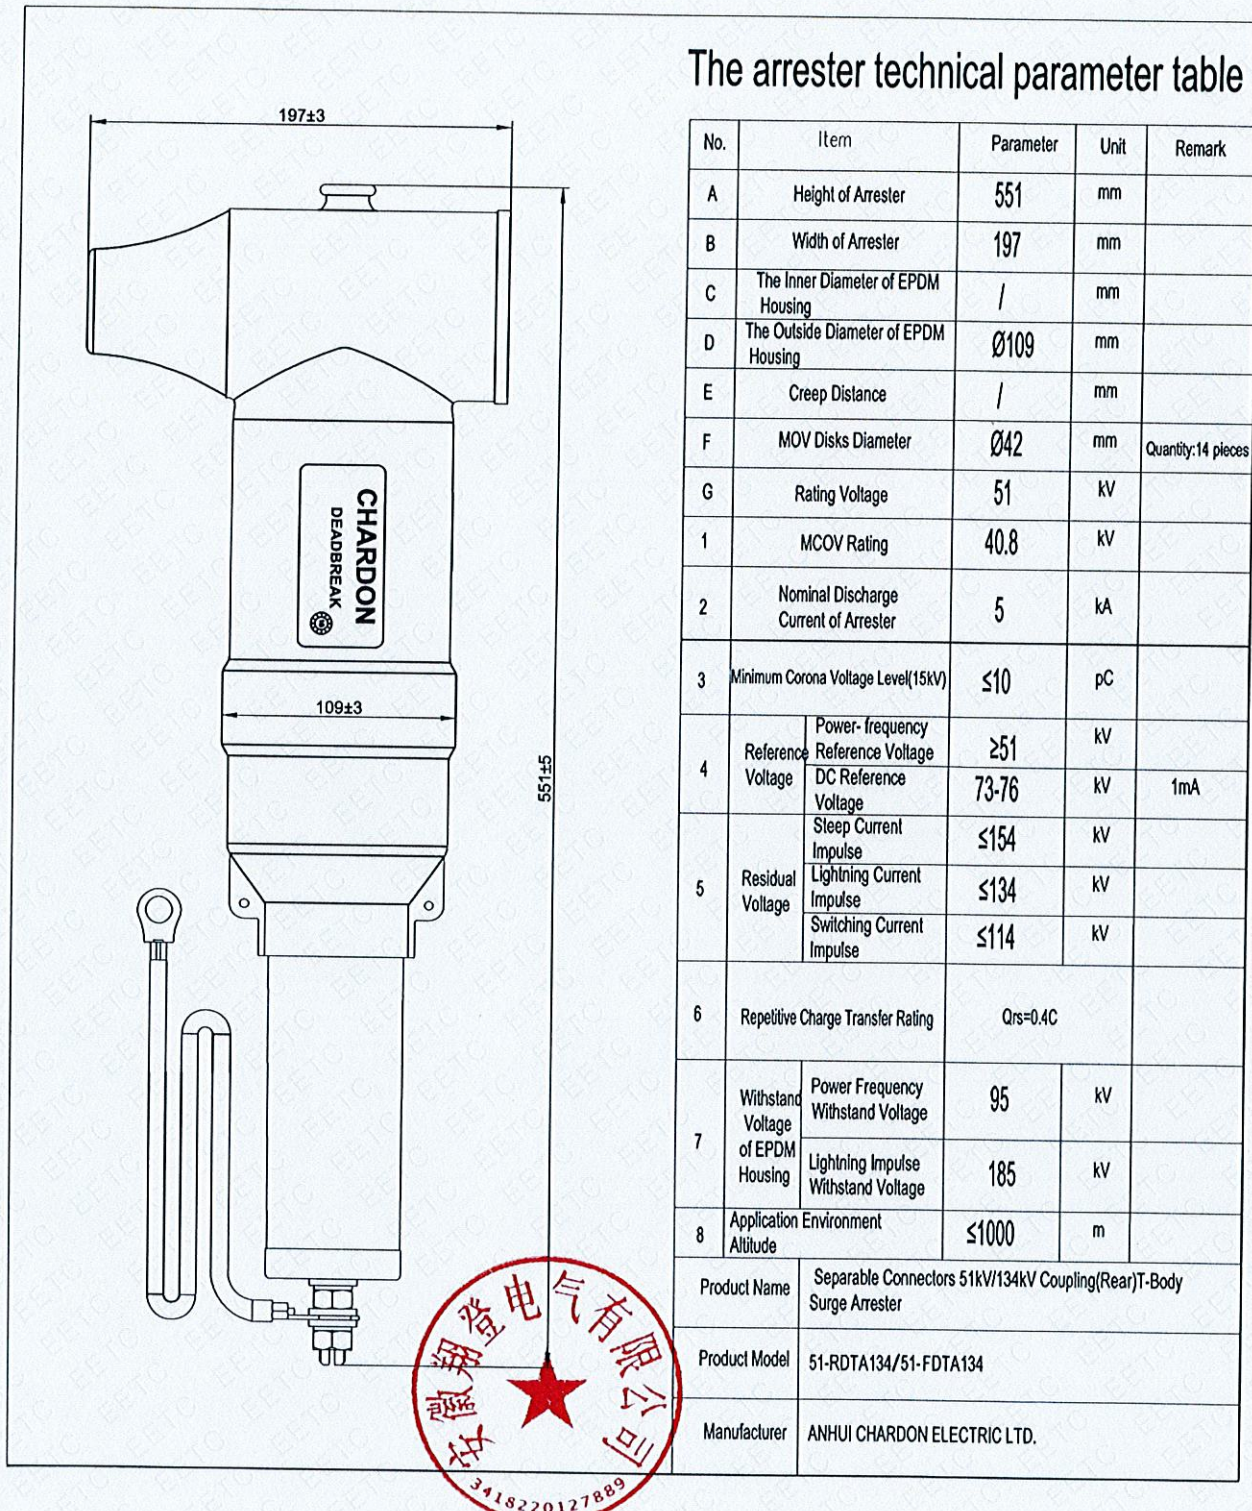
Dimensional drawing of 51-RDTA134/51-FDTA134
